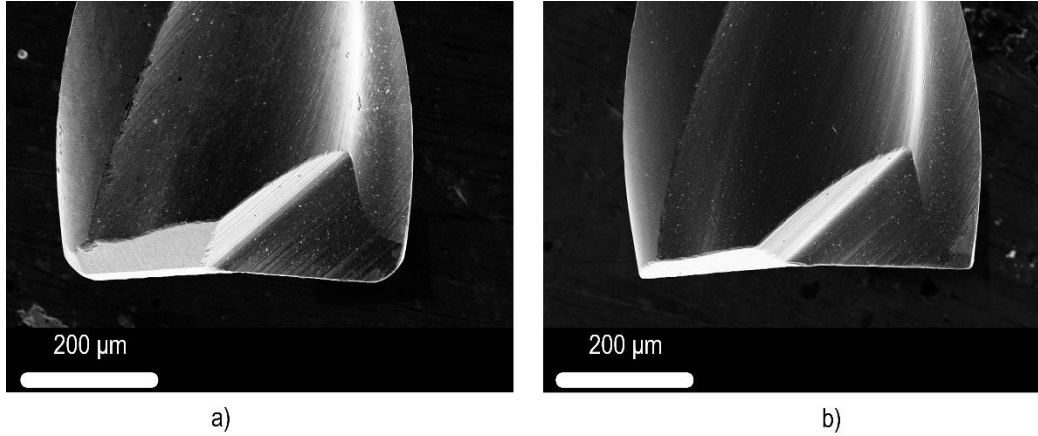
Micro end mills (SEM 500x). a) REM tool after machining 24 pins, b) FEM after machining 24 pins.
